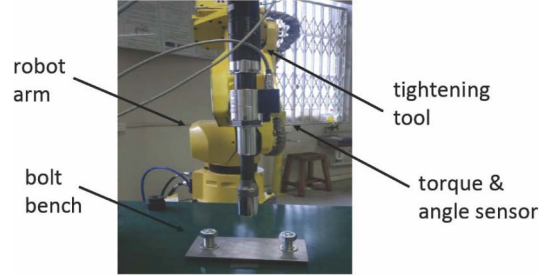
Bolt-tightening tool mounted on a robot arm.
